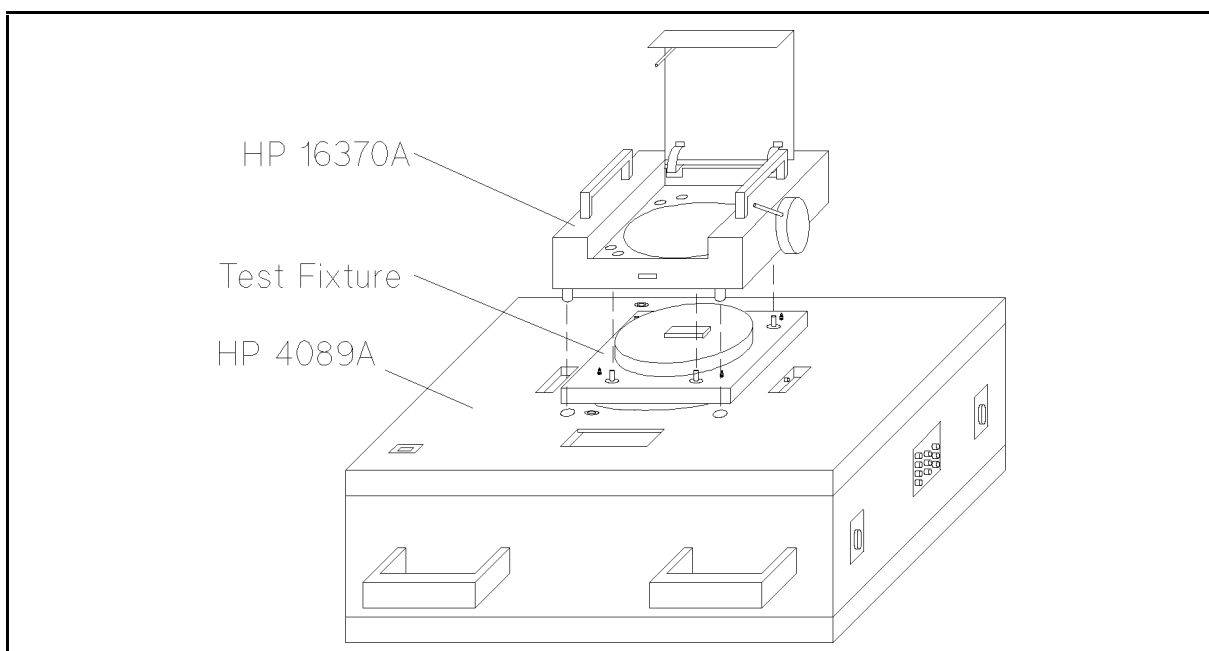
Test Fixture Adapter (for 96-pin SWMs)
